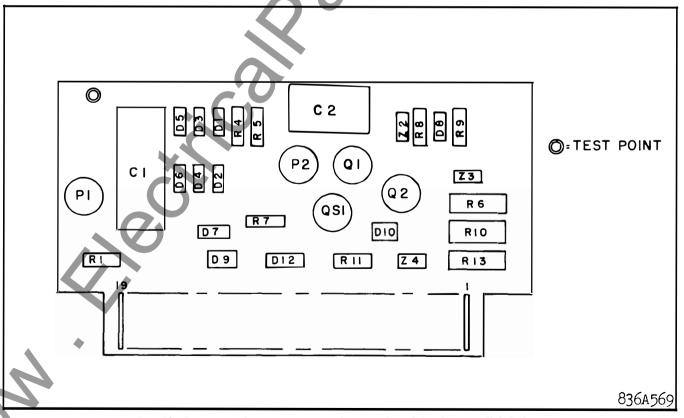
Component location on printed circuit board for the type SI-1 Relay.
